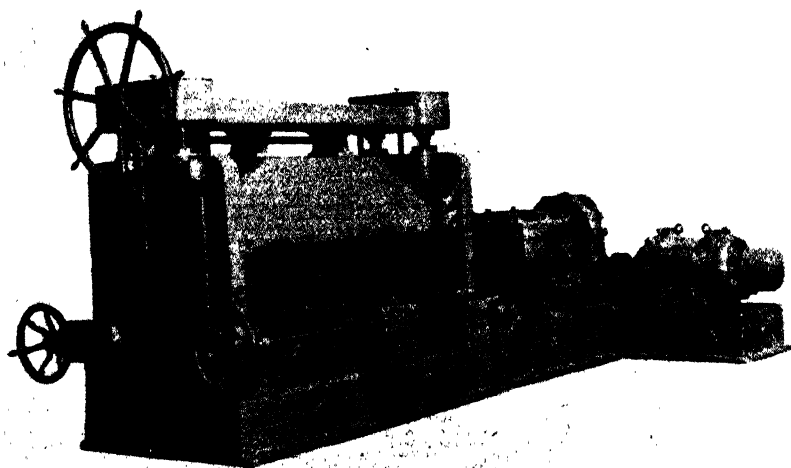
Roller levelling machine for sheets (W. H. A. Robertson and Co. Ltd.).
